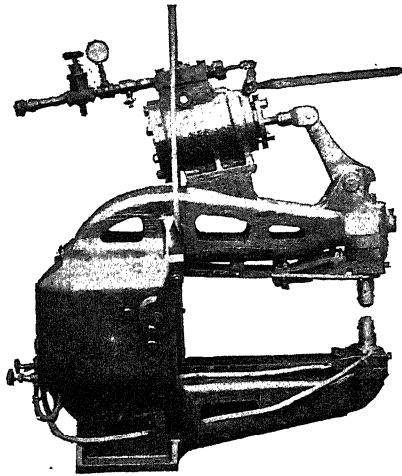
PORTABLE SPOT WELDER WITH 27-IN. GAP.
